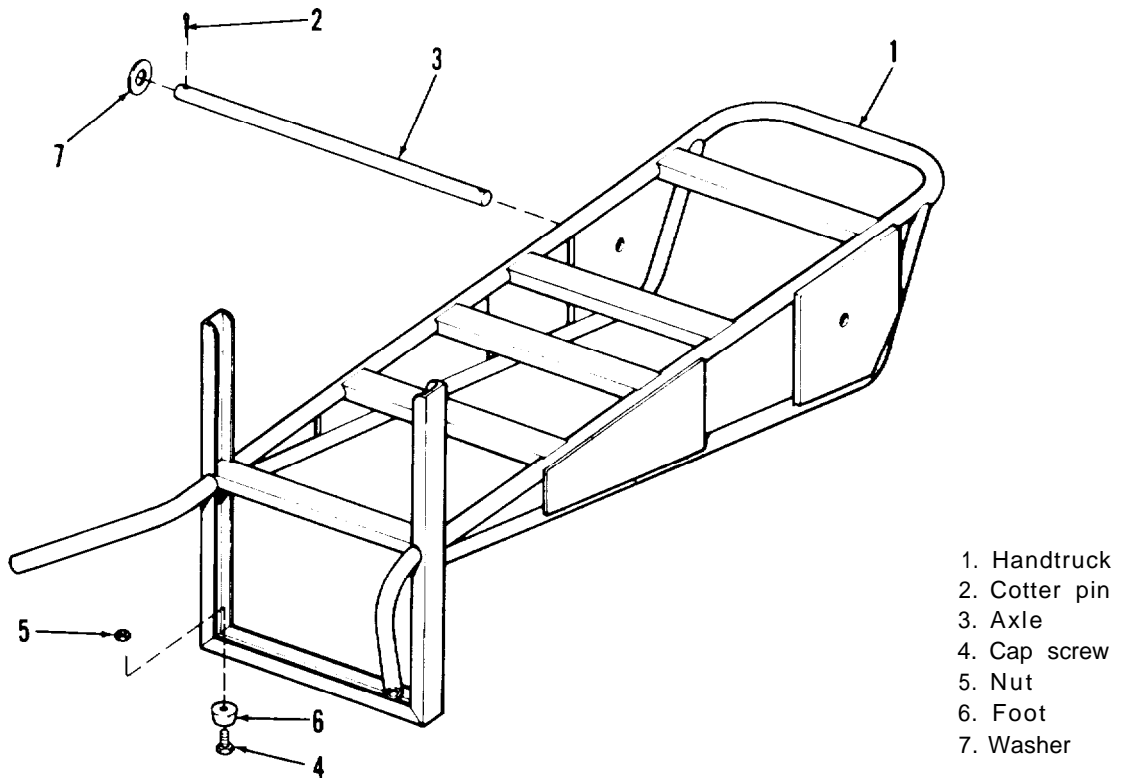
Handtruck assembly, disassembly and reassembly.
